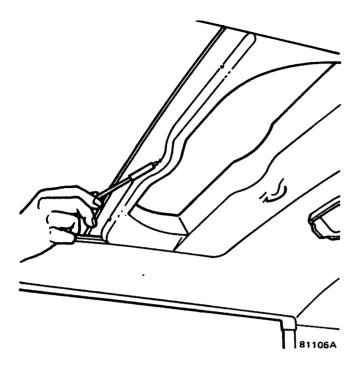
L-12 Removing/Installing Halo Assembly Attaching Screws
